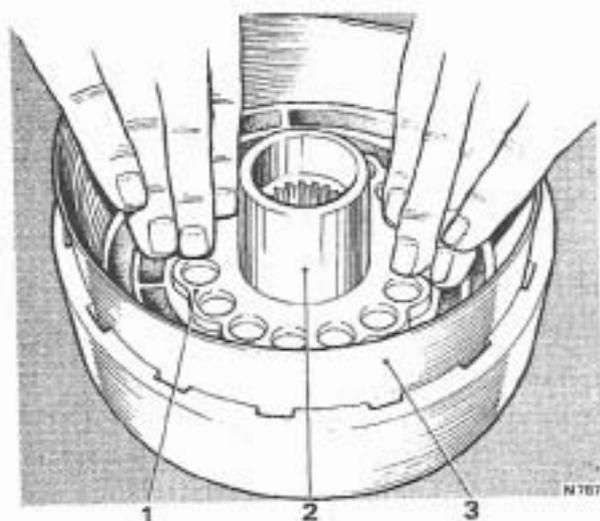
FITTING THE DIRECT CLUTCH PISTON
